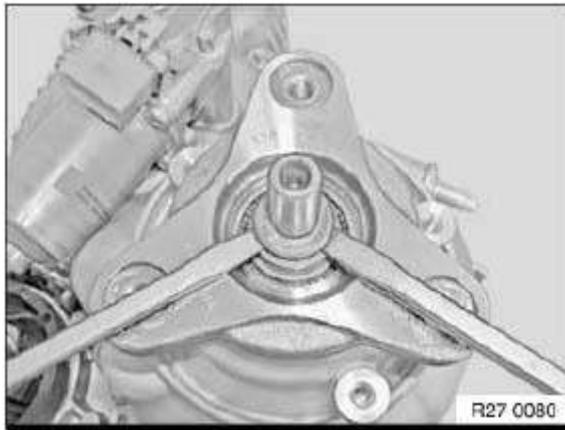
Pressing Down Output Flange Using Screwdrivers
